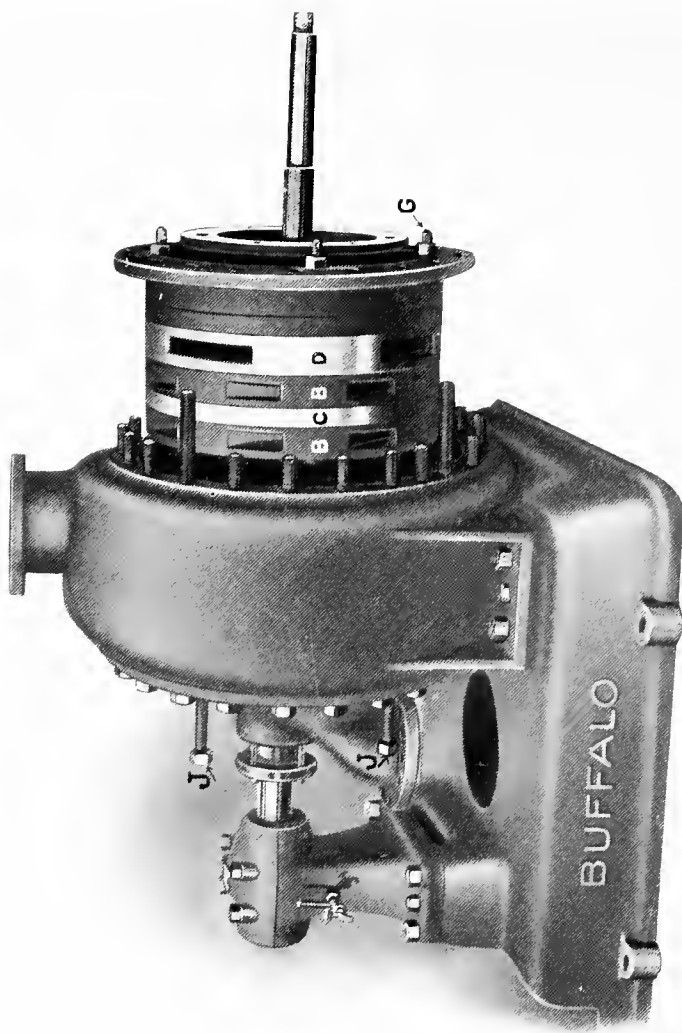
A multi-stage centrifugal pump partly disassembled to show diffusion vanes and a portion of impeller.
